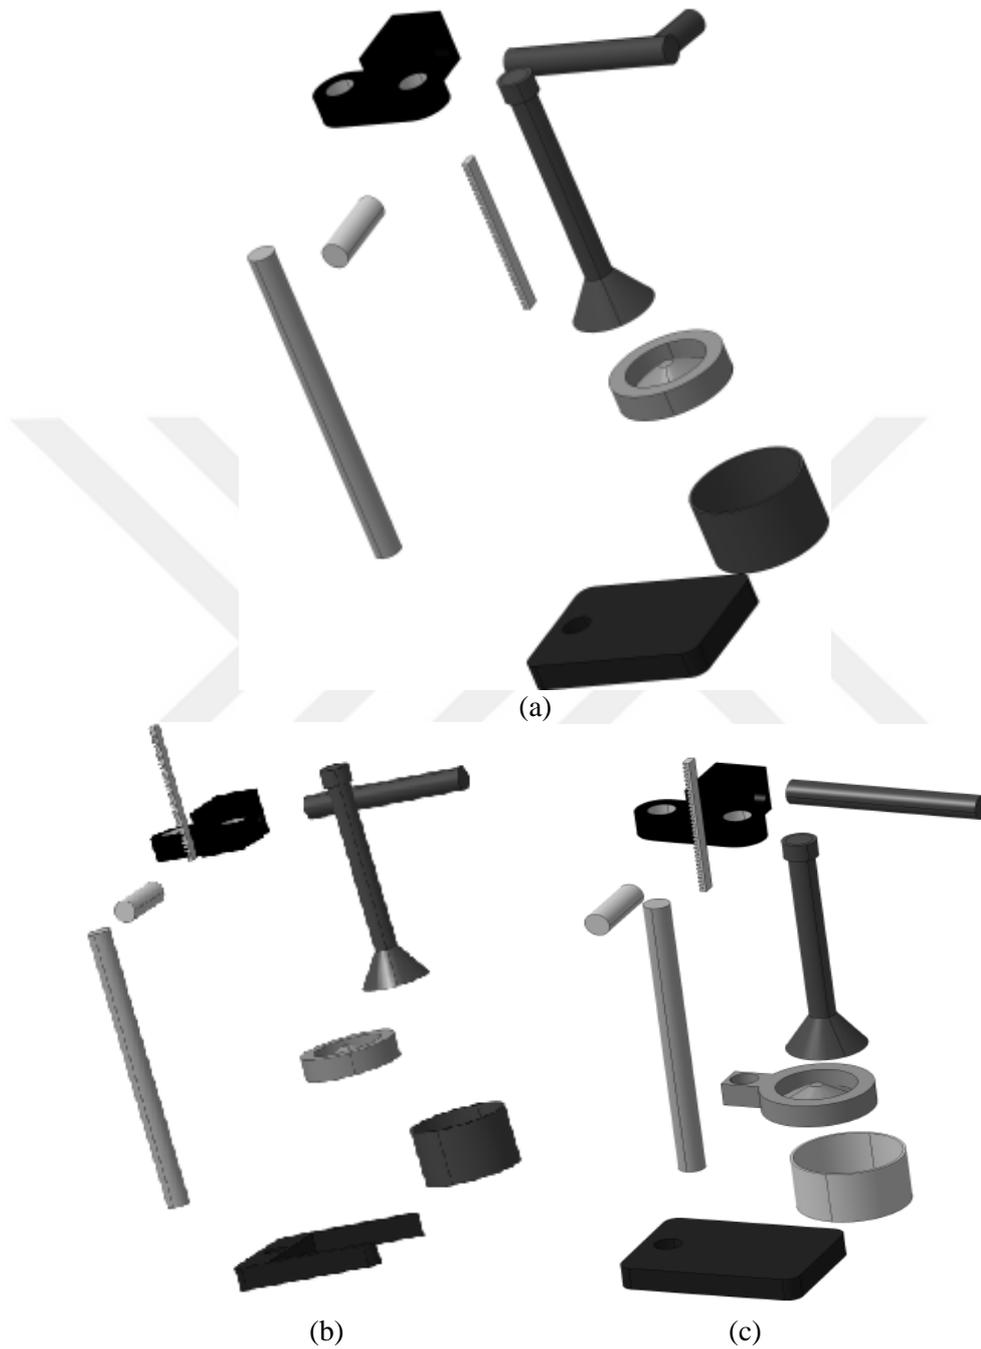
Assembly parts of (a) the best mechanical fruit press design alternative (b) The second best (number 3 design alternative) (c) The third best (number 4 design alternative).
